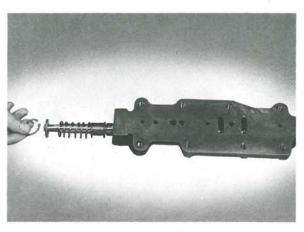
Install the valve spool, spring, spacer and washer. Compress spring and install retainer ring.
